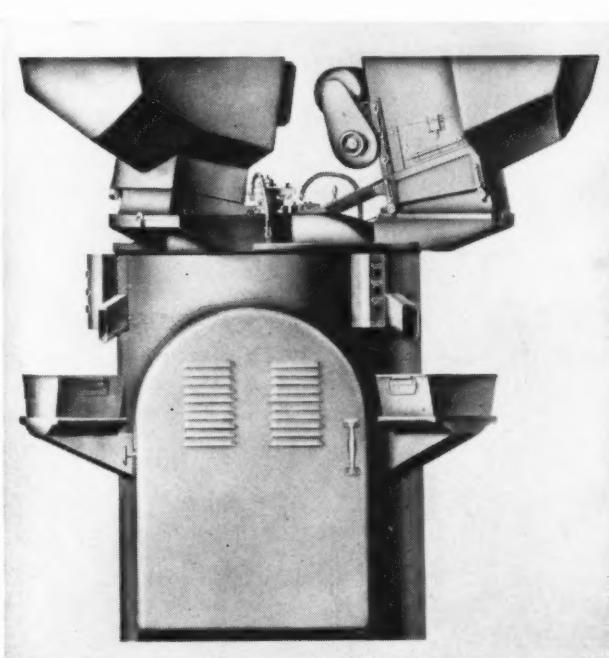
"Hyper-Production" thread-rolling machine brought out by Batchelder Engineering Co.
